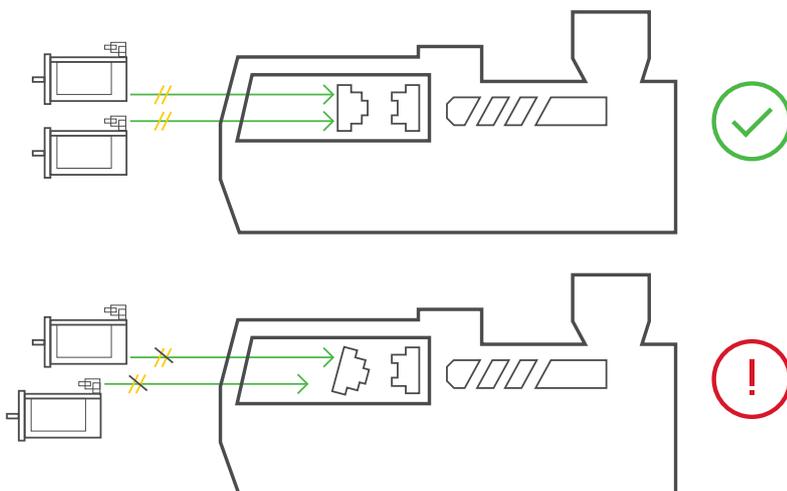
Synchronized & unsynchronized EIMM mold movement & possible cause
